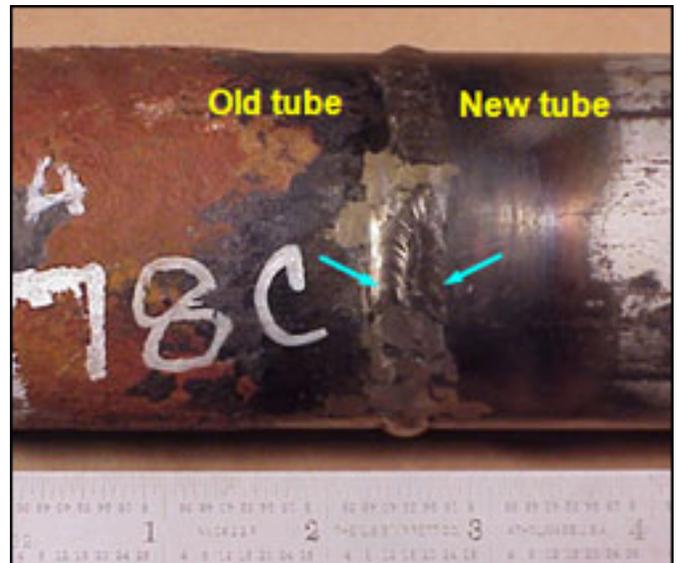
Two weld beads (arrows) on the OD of the bottom portion of the tube sample.
